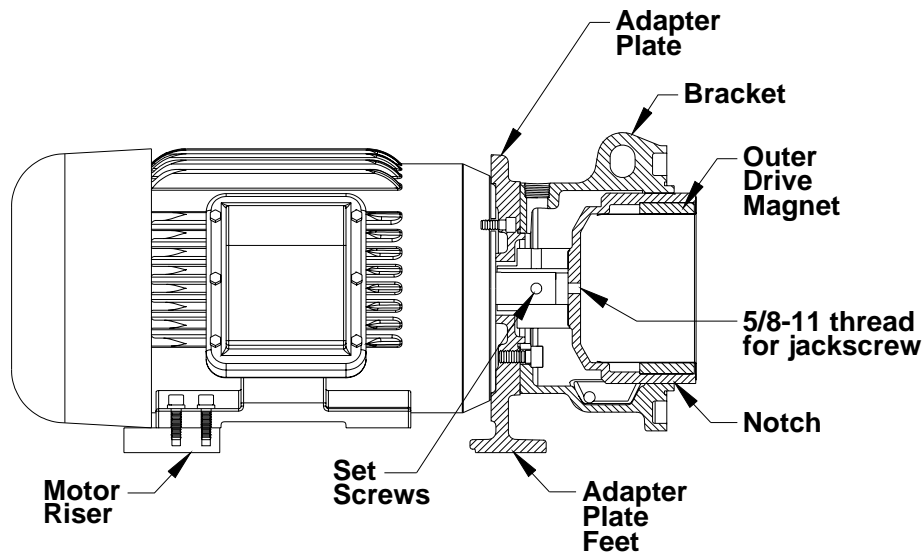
DRIVE END ASSEMBLY, NEMA or IEC/JIS MOTORS
